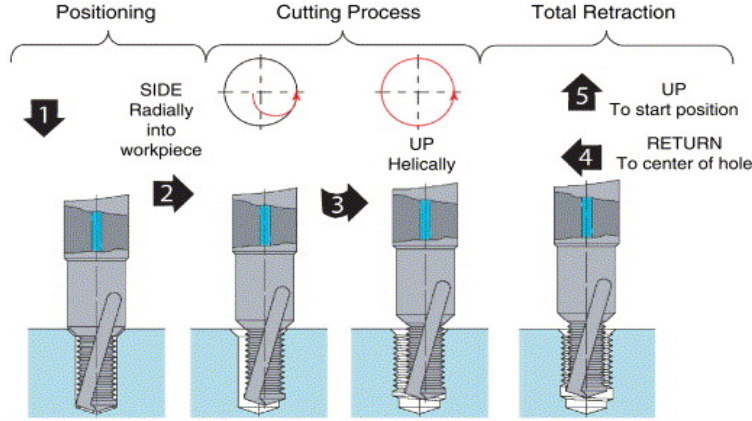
; machining process of thread milling [A.C. Araujo et al., 2005]
